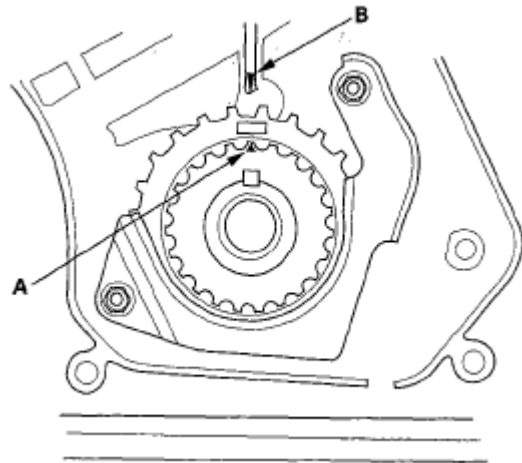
Identifying TDC Mark On Tooth Of Timing Belt Drive Pulley With Pointer On Oil Pump
